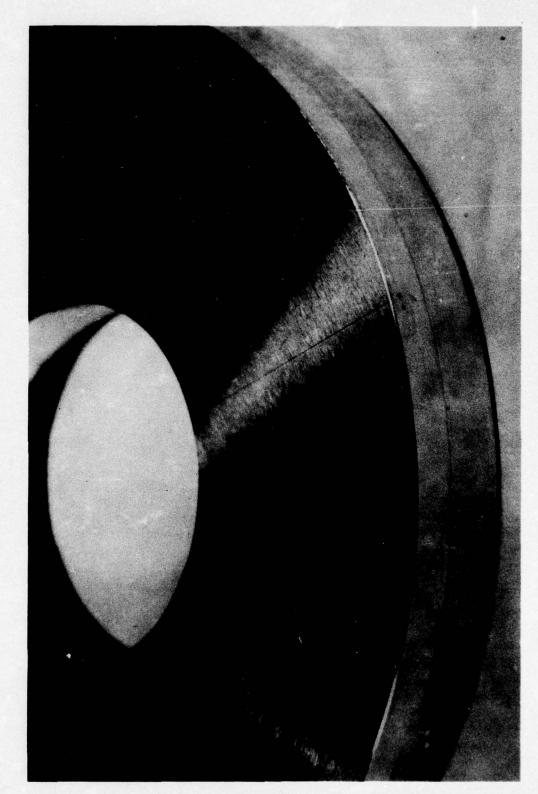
Sample S₂ - closeup view of hole 11 with tape removed
